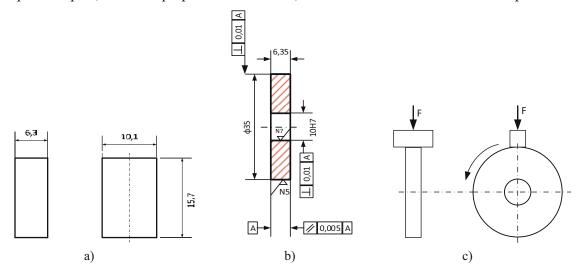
Technical drawings of a) a sample b) the friction disc; c) position of the sample on the testing device
